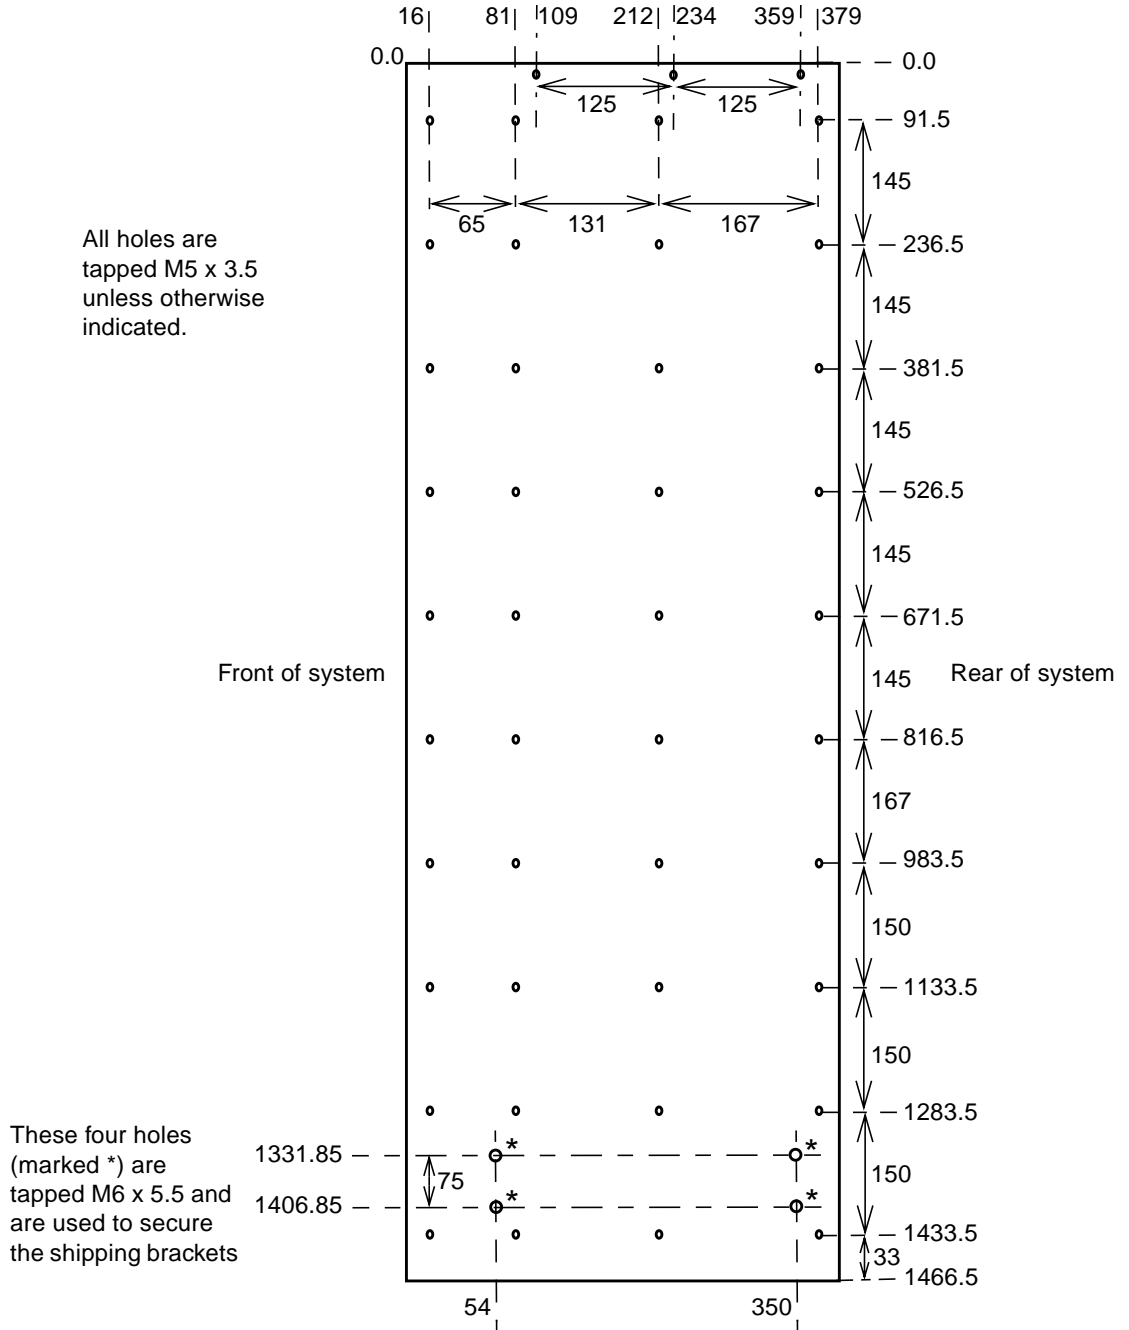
Chassis Mounting Hole Arrangement (all measurements in millimeters)
